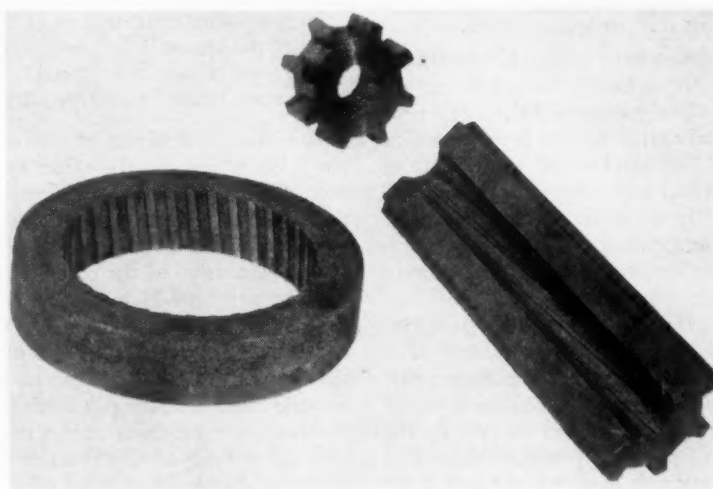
SECTION OF 105-MM AND 20-MM BARRELS BROACHED BY AMERICAN BROACH & MACHINE COMPANY
